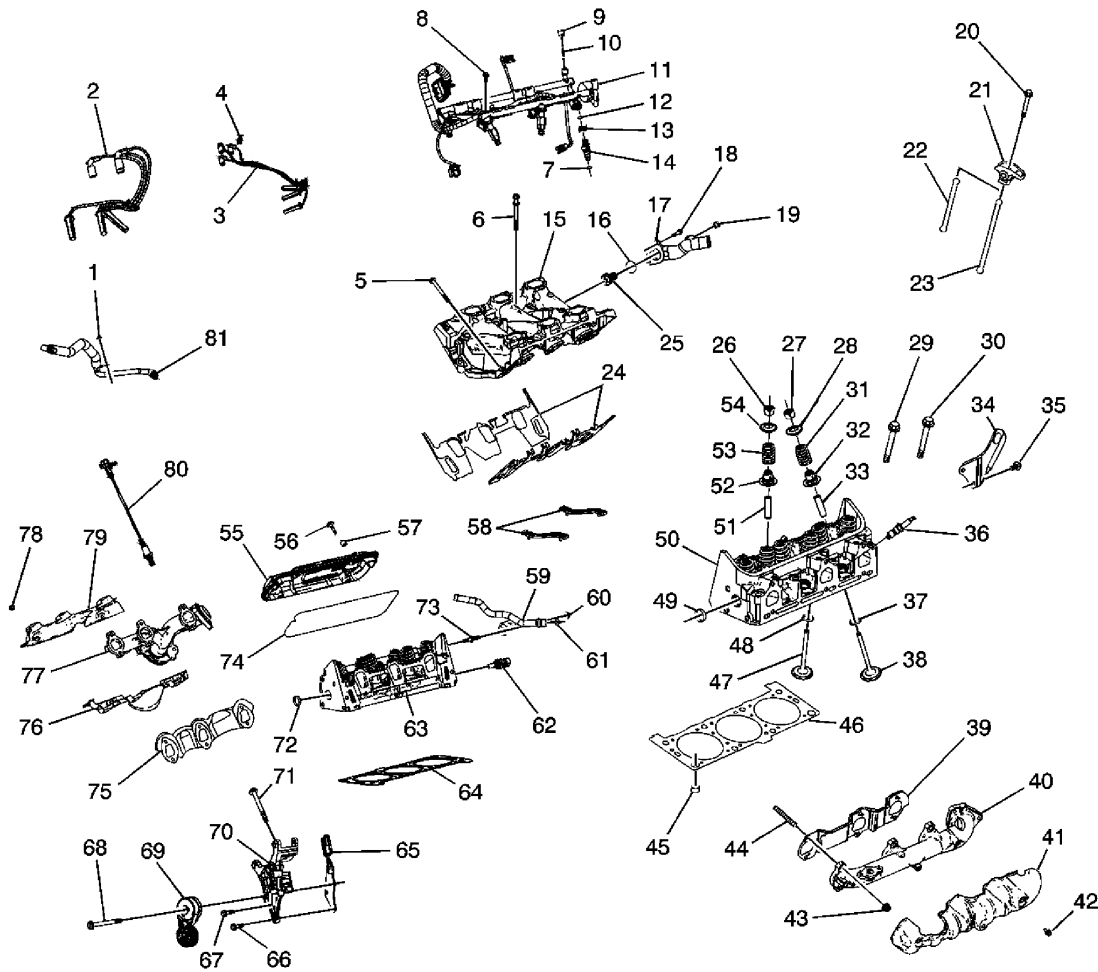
View Of Intake Manifold, Cylinder Head & Components
